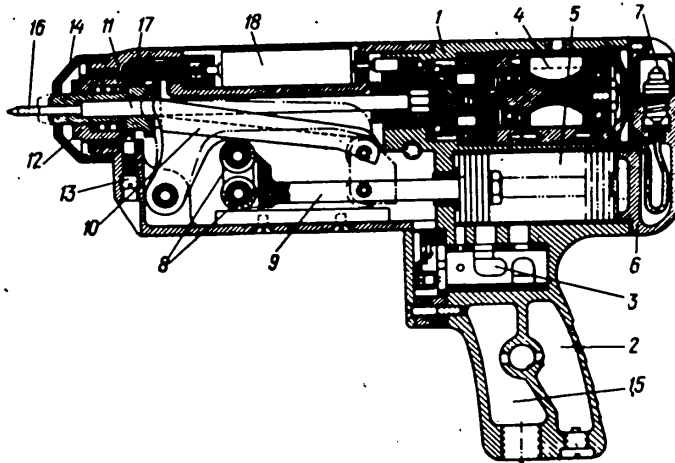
Design of the Press KO-3 for Riveting Threaded Shell-Type Rivets
